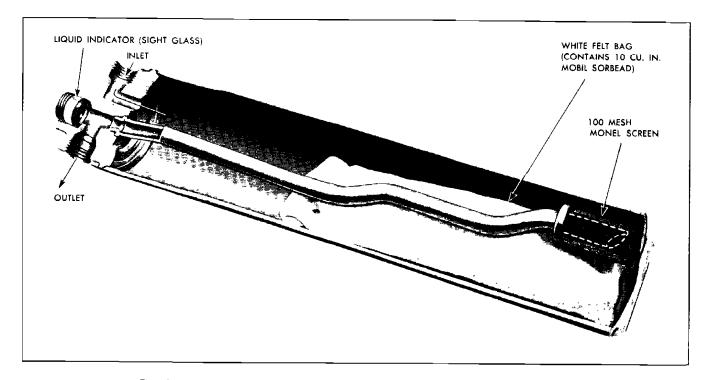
Cross Section of Pontiac Receiver and Liquid Indicator Assembly
